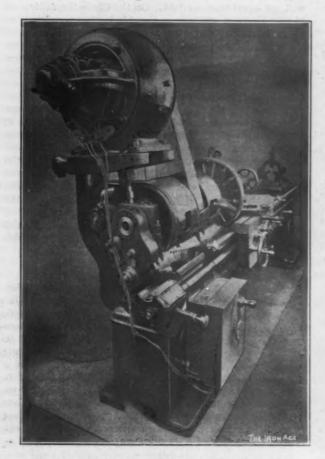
A Typical Motor Drive as Applied to a Lathe.
